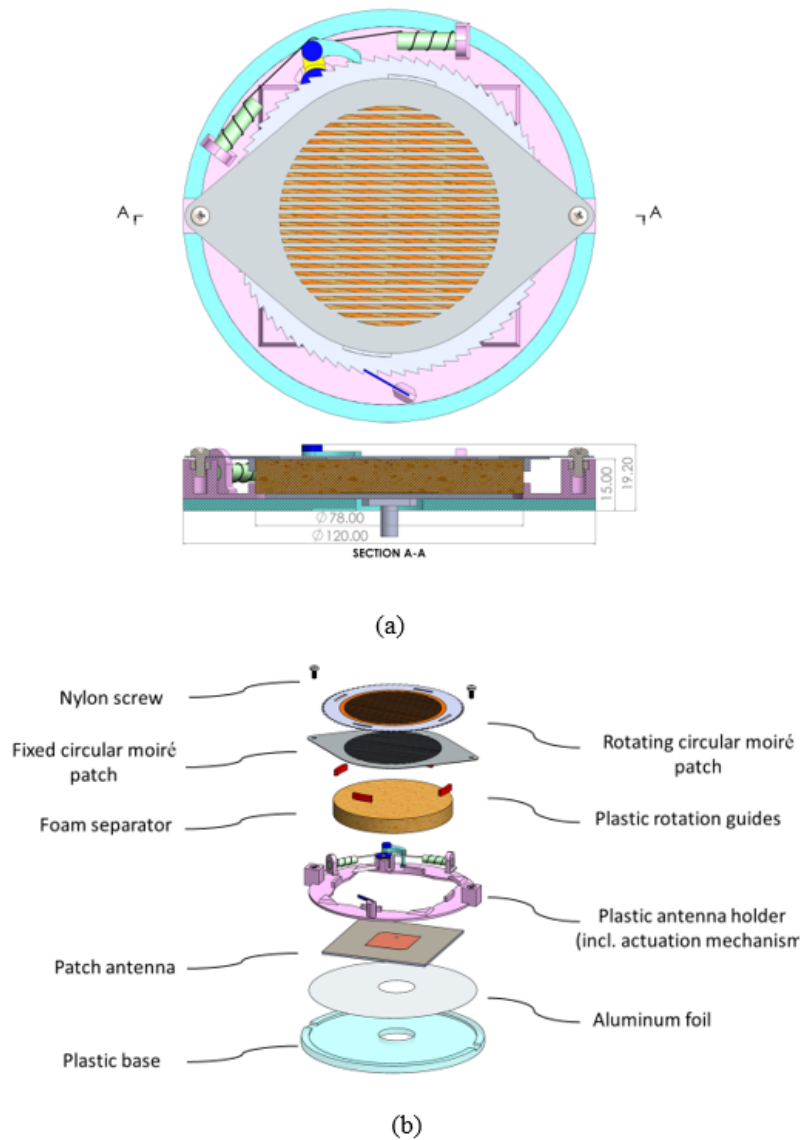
CAD representation of the proposed reconfigurable antenna seen as (a) a top view along its cross-sectional view, (b) an exploded view.
